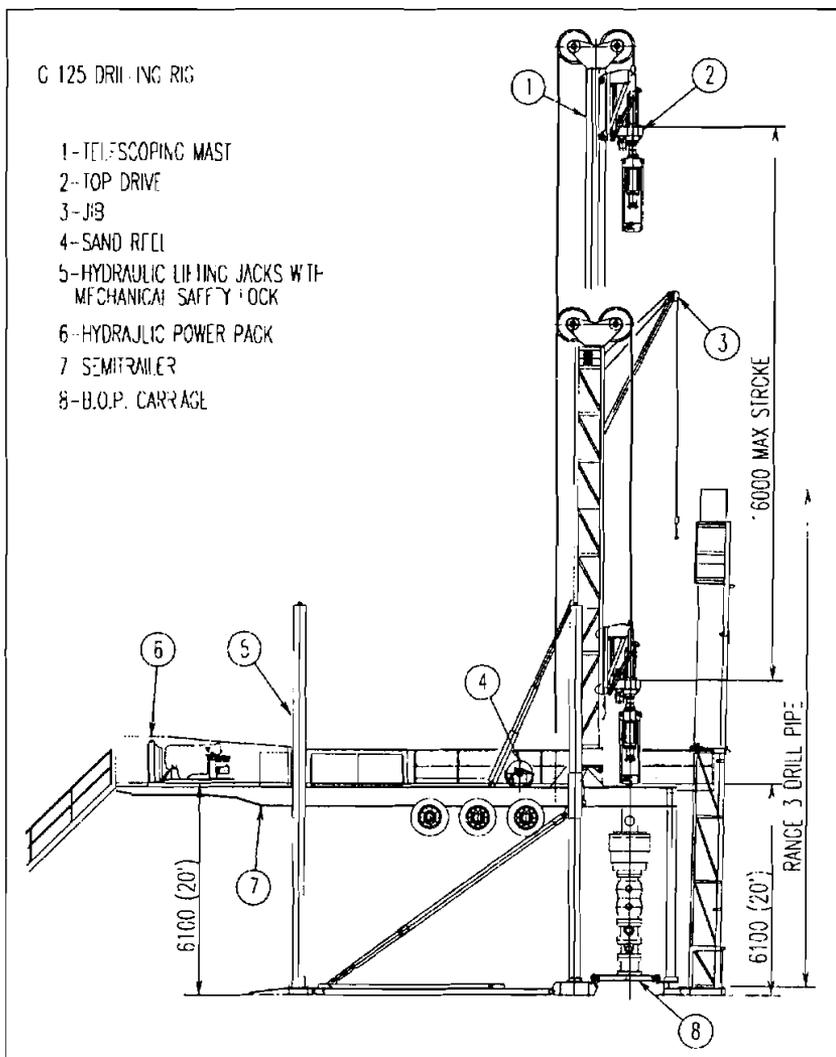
Design of New Drilling Rig (Schenato et al., 1995)
